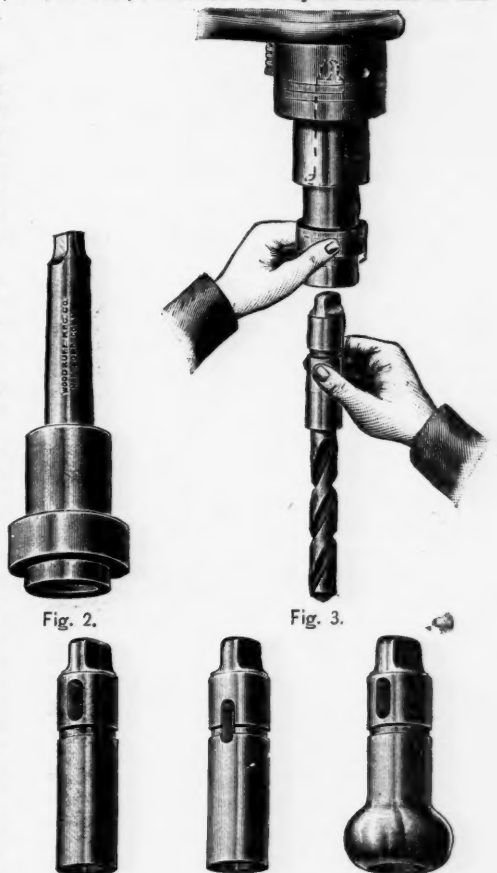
shows the chuck and fig. 3 the same chuck in the spindle of a drill press. The valuable feature of the tool is that the drill or auger can be taken out and replaced by another, without stopping the spindle. The lifting of the ring with the left hand releases the collet holding the drill and allows it to drop out; the dropping of the ring locks the new collet and drill. The locking ring may be held stationary while the chuck revolves in it. A complete set is composed of a chuck and nine collets, three of each of Morse standard tapers, Nos. 1, 2 and 3. The object in having three collets of each taper is to allow a change of drills to be made without stopping to drift the drill from the collet. Where several changes of the drills or counterbores are required in a piece of work this chuck and collets are almost indispensable. The construction of the chuck is simple and it is not likely to get out of order.
